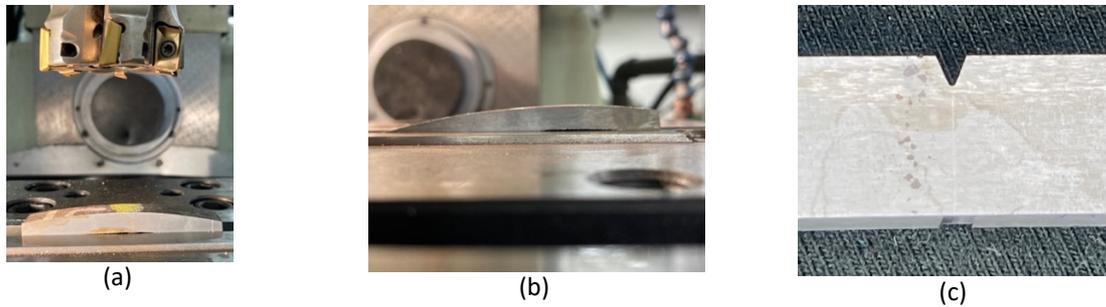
Preparation of Charpy specimens. (a) Milling of the top face, normal to the seam weld centreline. (b) The seam weld centreline was angled noticeably from the pipe's radial direction in several cases. (c) Notch after etching of the specimen's surface. The seam weld centreline is visible in the picture.
